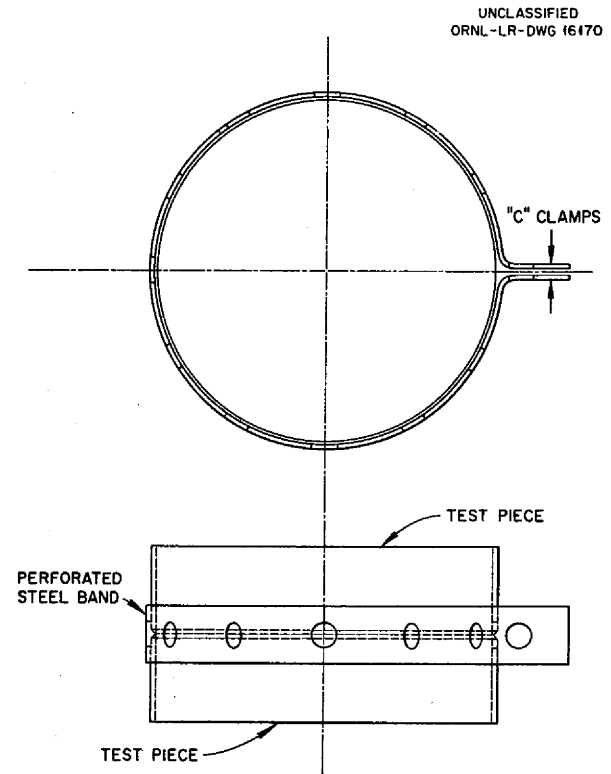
Joint Design for Shrinkage Test of Inconel Plate Welds.
